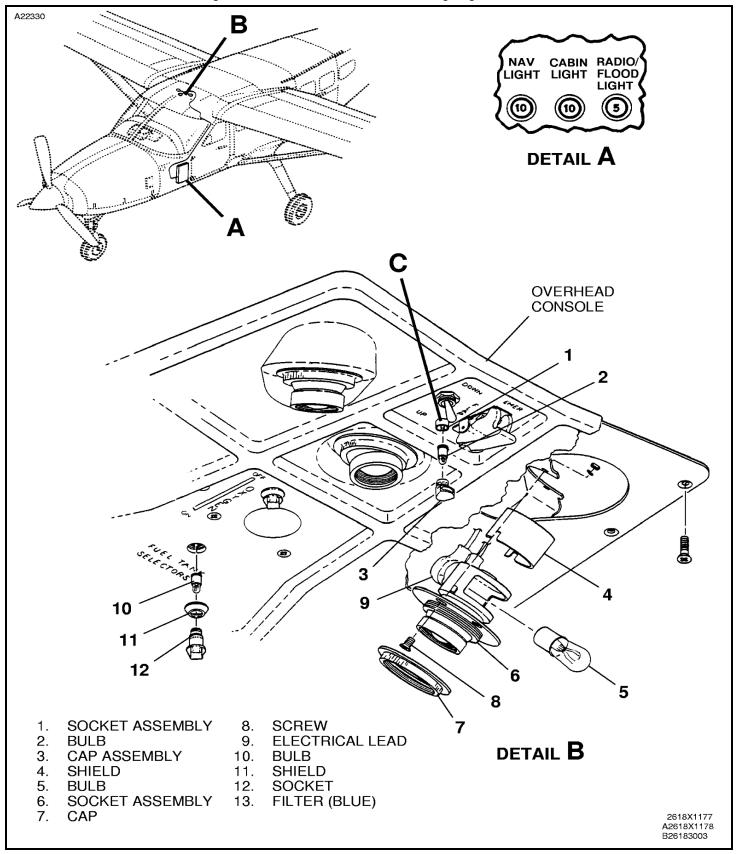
Sheet 1 : Overhead Console Lighting Installation
